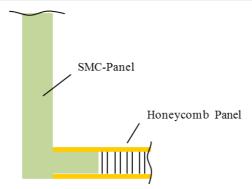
Schematic drawing of the sidewall panel assembly (CTC GmbH)
